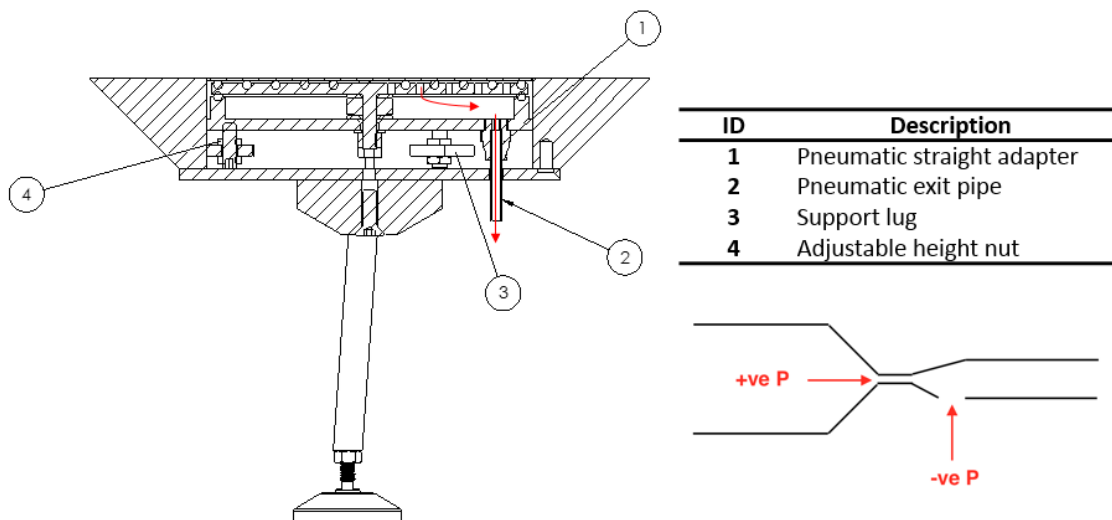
Assembly drawing (section view) of workholding solution with part list (2 of 2) and schematic of vacuum pump mechanism.
